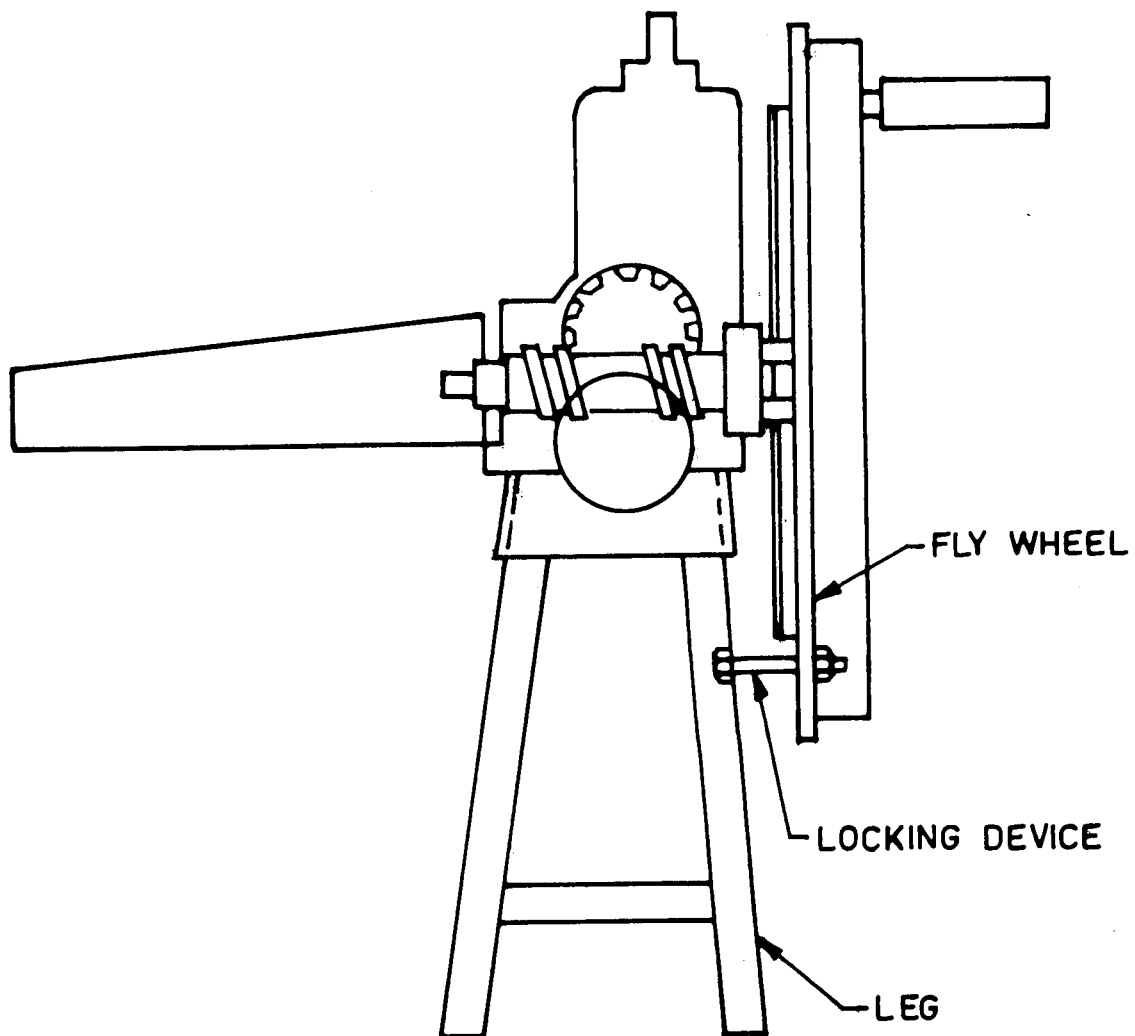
A TYPICAL LOCKING ARRANGEMENT FOR CHAFF CUTTER
